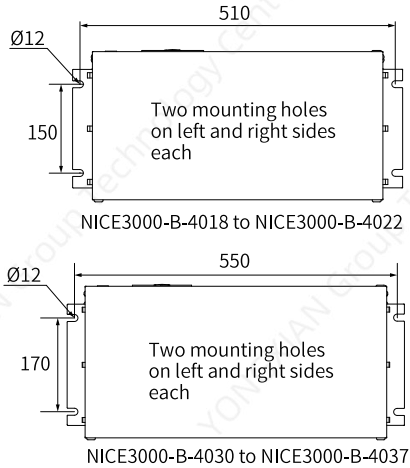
Locations and dimensions of the mounting holes of the floor-mounted control cabinet (Unit: mm)
